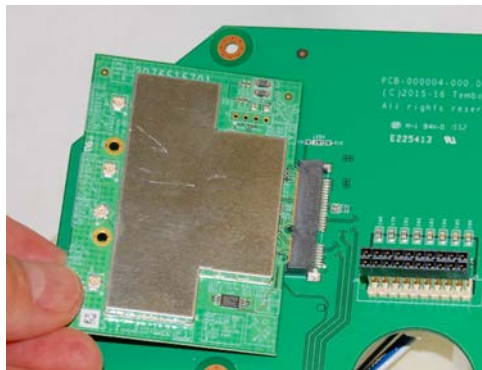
Insert 802.11bgn WiFi Radio Module in to the PCIe Connector
